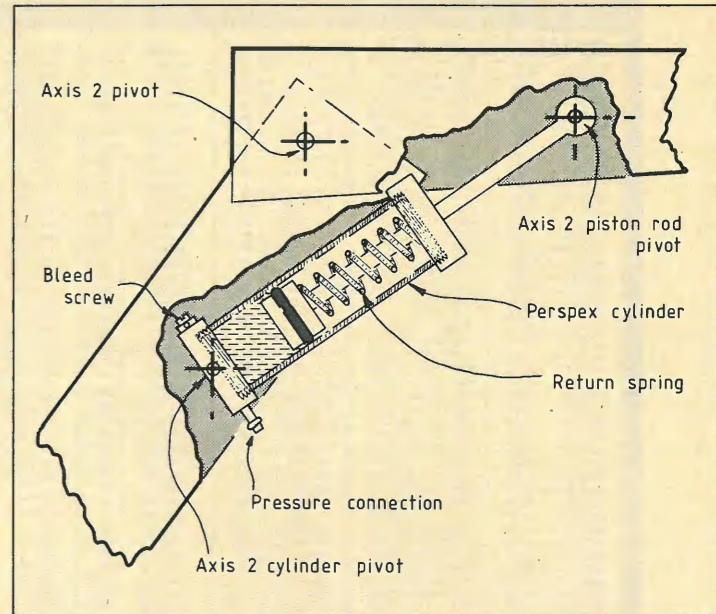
Axis 2 actuator is a single-acting piston and cylinder assembly of conventional design. Water is retained within the cylinder by a p.t.f.e. band and O-ring seal around the piston.
